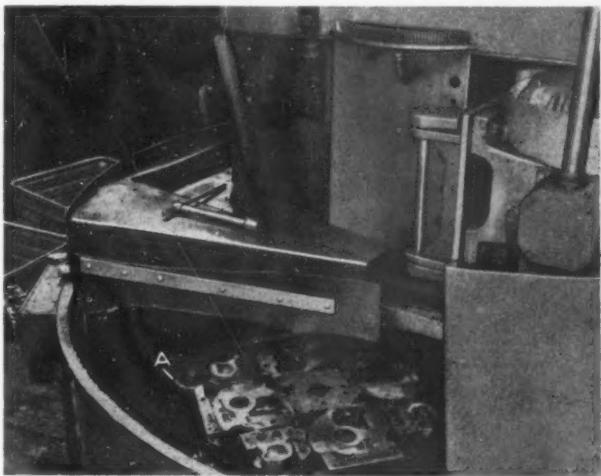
Close-up View of One of the Two Tables on the Besly-Bowen Vertical-spindle Surface Grinder, Showing the Fixture in which Four Rear Extension and Four Oil Pump Body Castings are Accommodated Simultaneously
